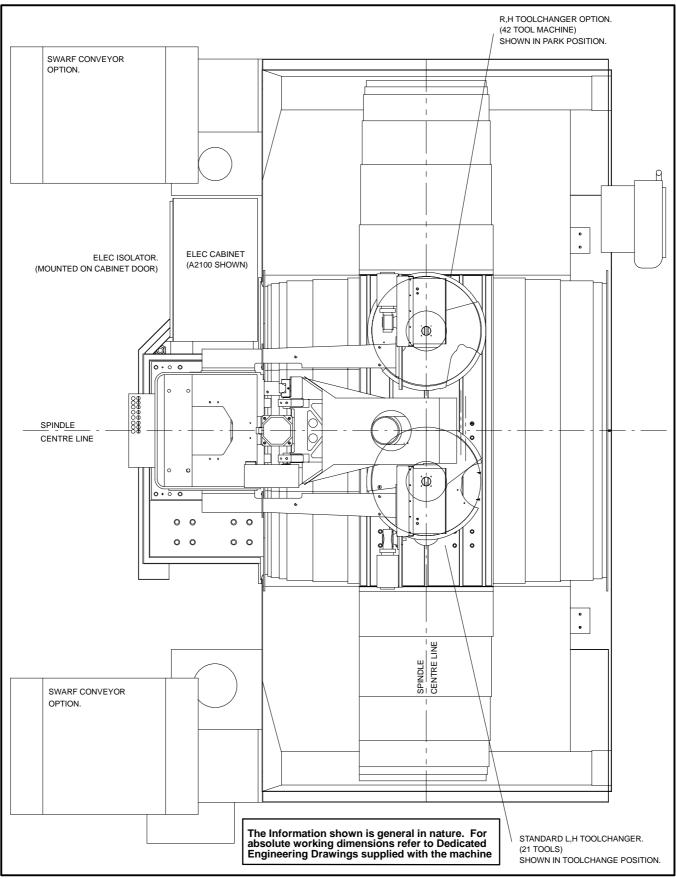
Range Drawing for Arrow (ERD) 1250, 1500, 2000 - Plan View
